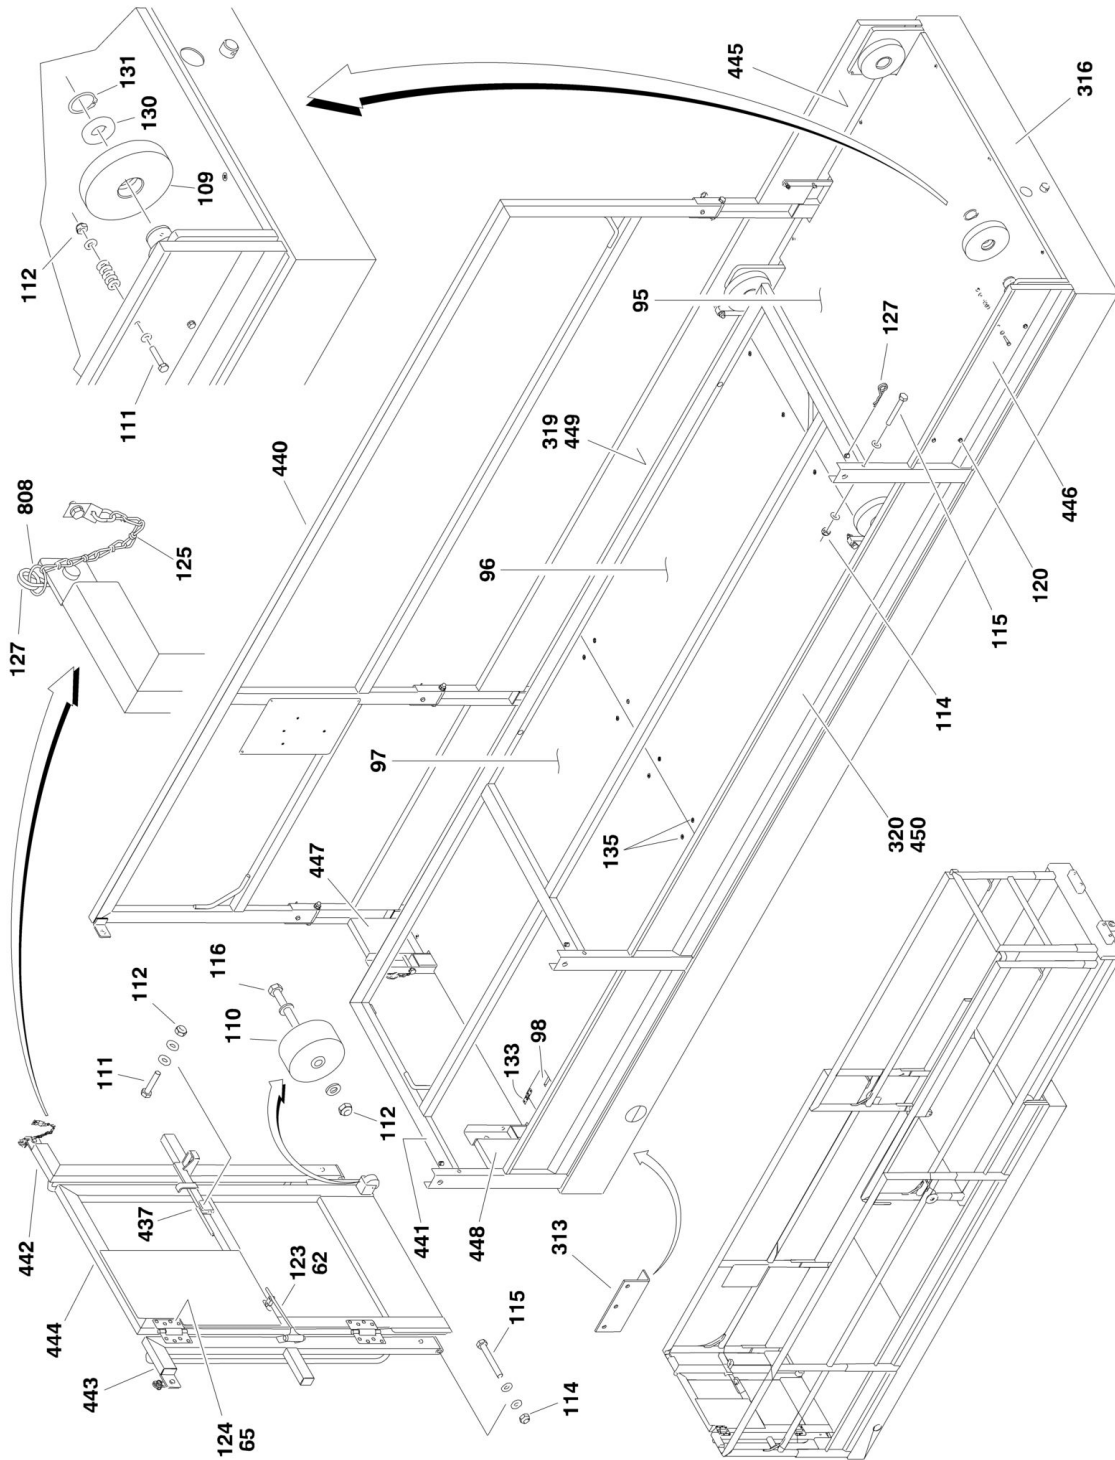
SCISSORS PROTECTION INSTALLATION
